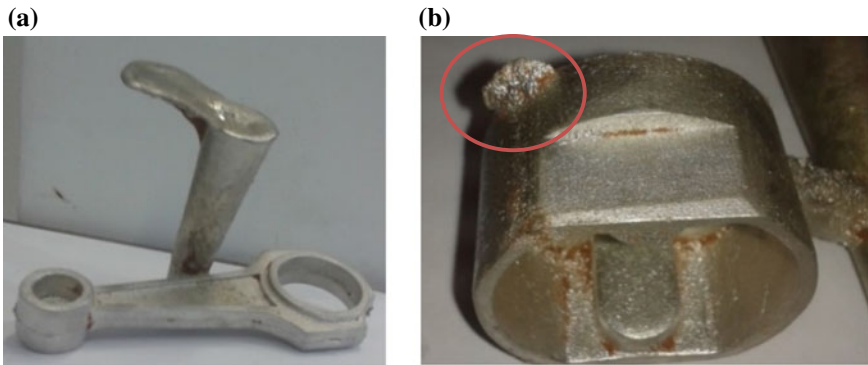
Final parts. Connecting rod (a) and superficial defects in piston (b)
